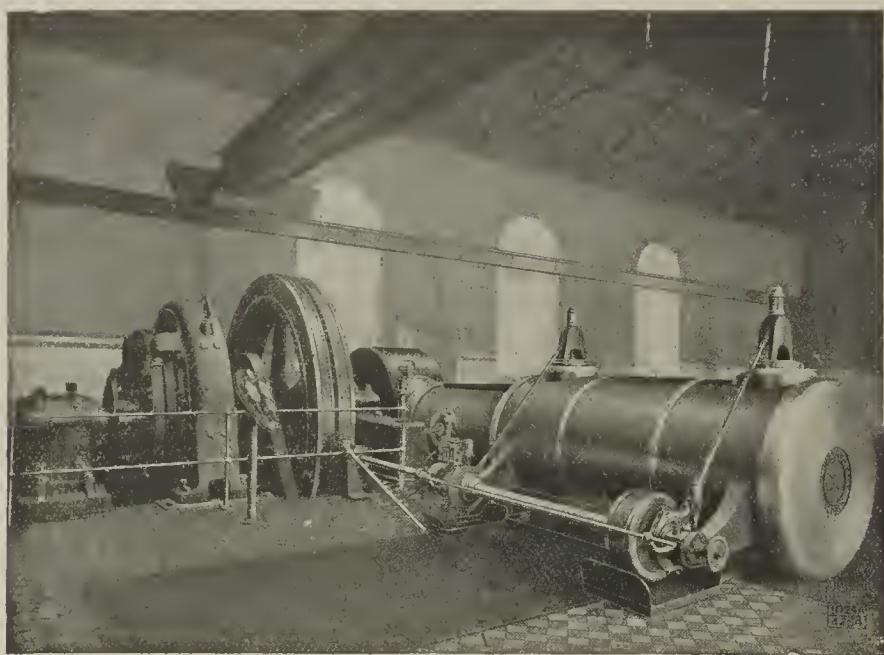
600/800 BRAKE-HORSE-POWER ROBEY UNIFLOW ENGINE.
